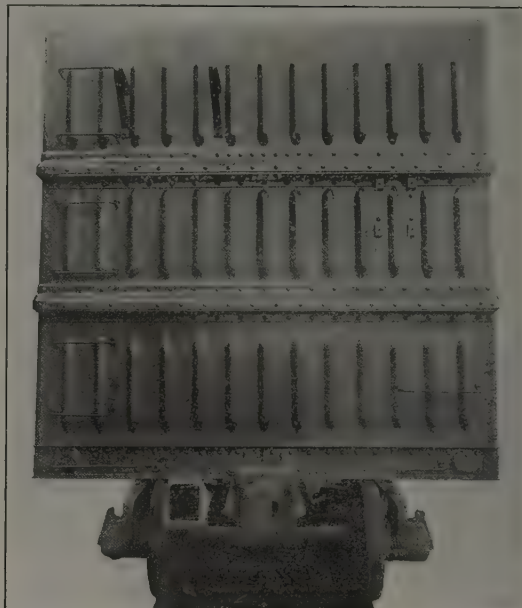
American Car & Foundry Company Three-Piece Steel End.
